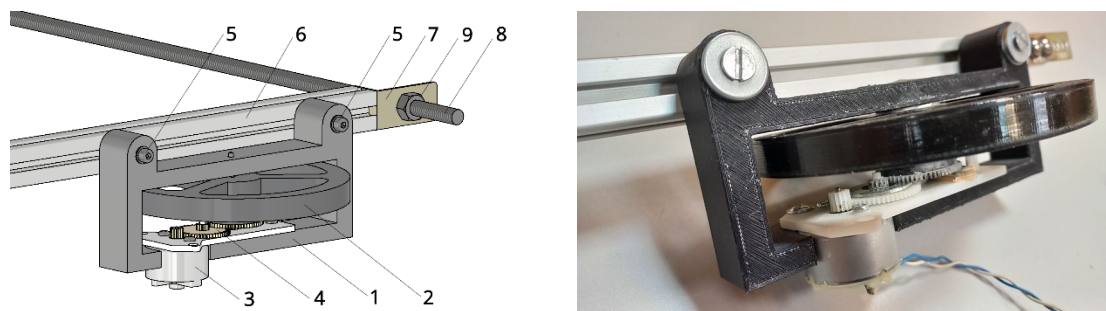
Construction of a sound generating mechanism (1 – body of mechanism, 2 – wheel, 3 – DC motor, 4 – gear, 5 – screws, 6 – aluminum profile, 7 – angle bar, 8 – threaded pin, 9 – screw nut).
